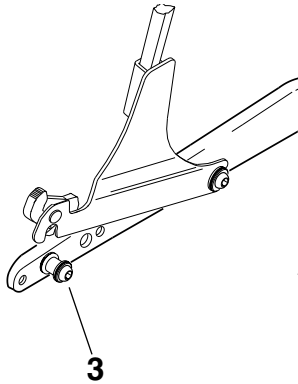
Detachable Sissybar Sideplate Assembly (Typical sideplate shown for illustration purposes.)
